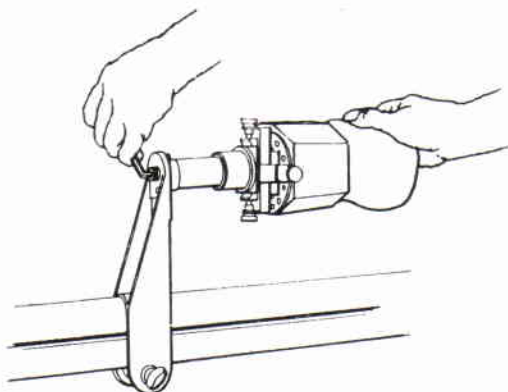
Attachment of adjustable shank (with socket and socket block) to ankle bracket of alignment-duplication jig.
